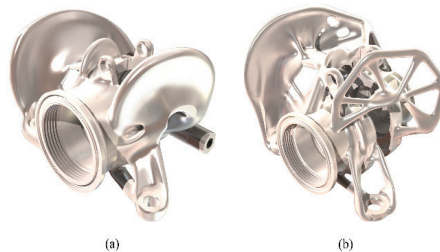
The optimized housings in SolidWorks: (a) Front, (b) Rear.
